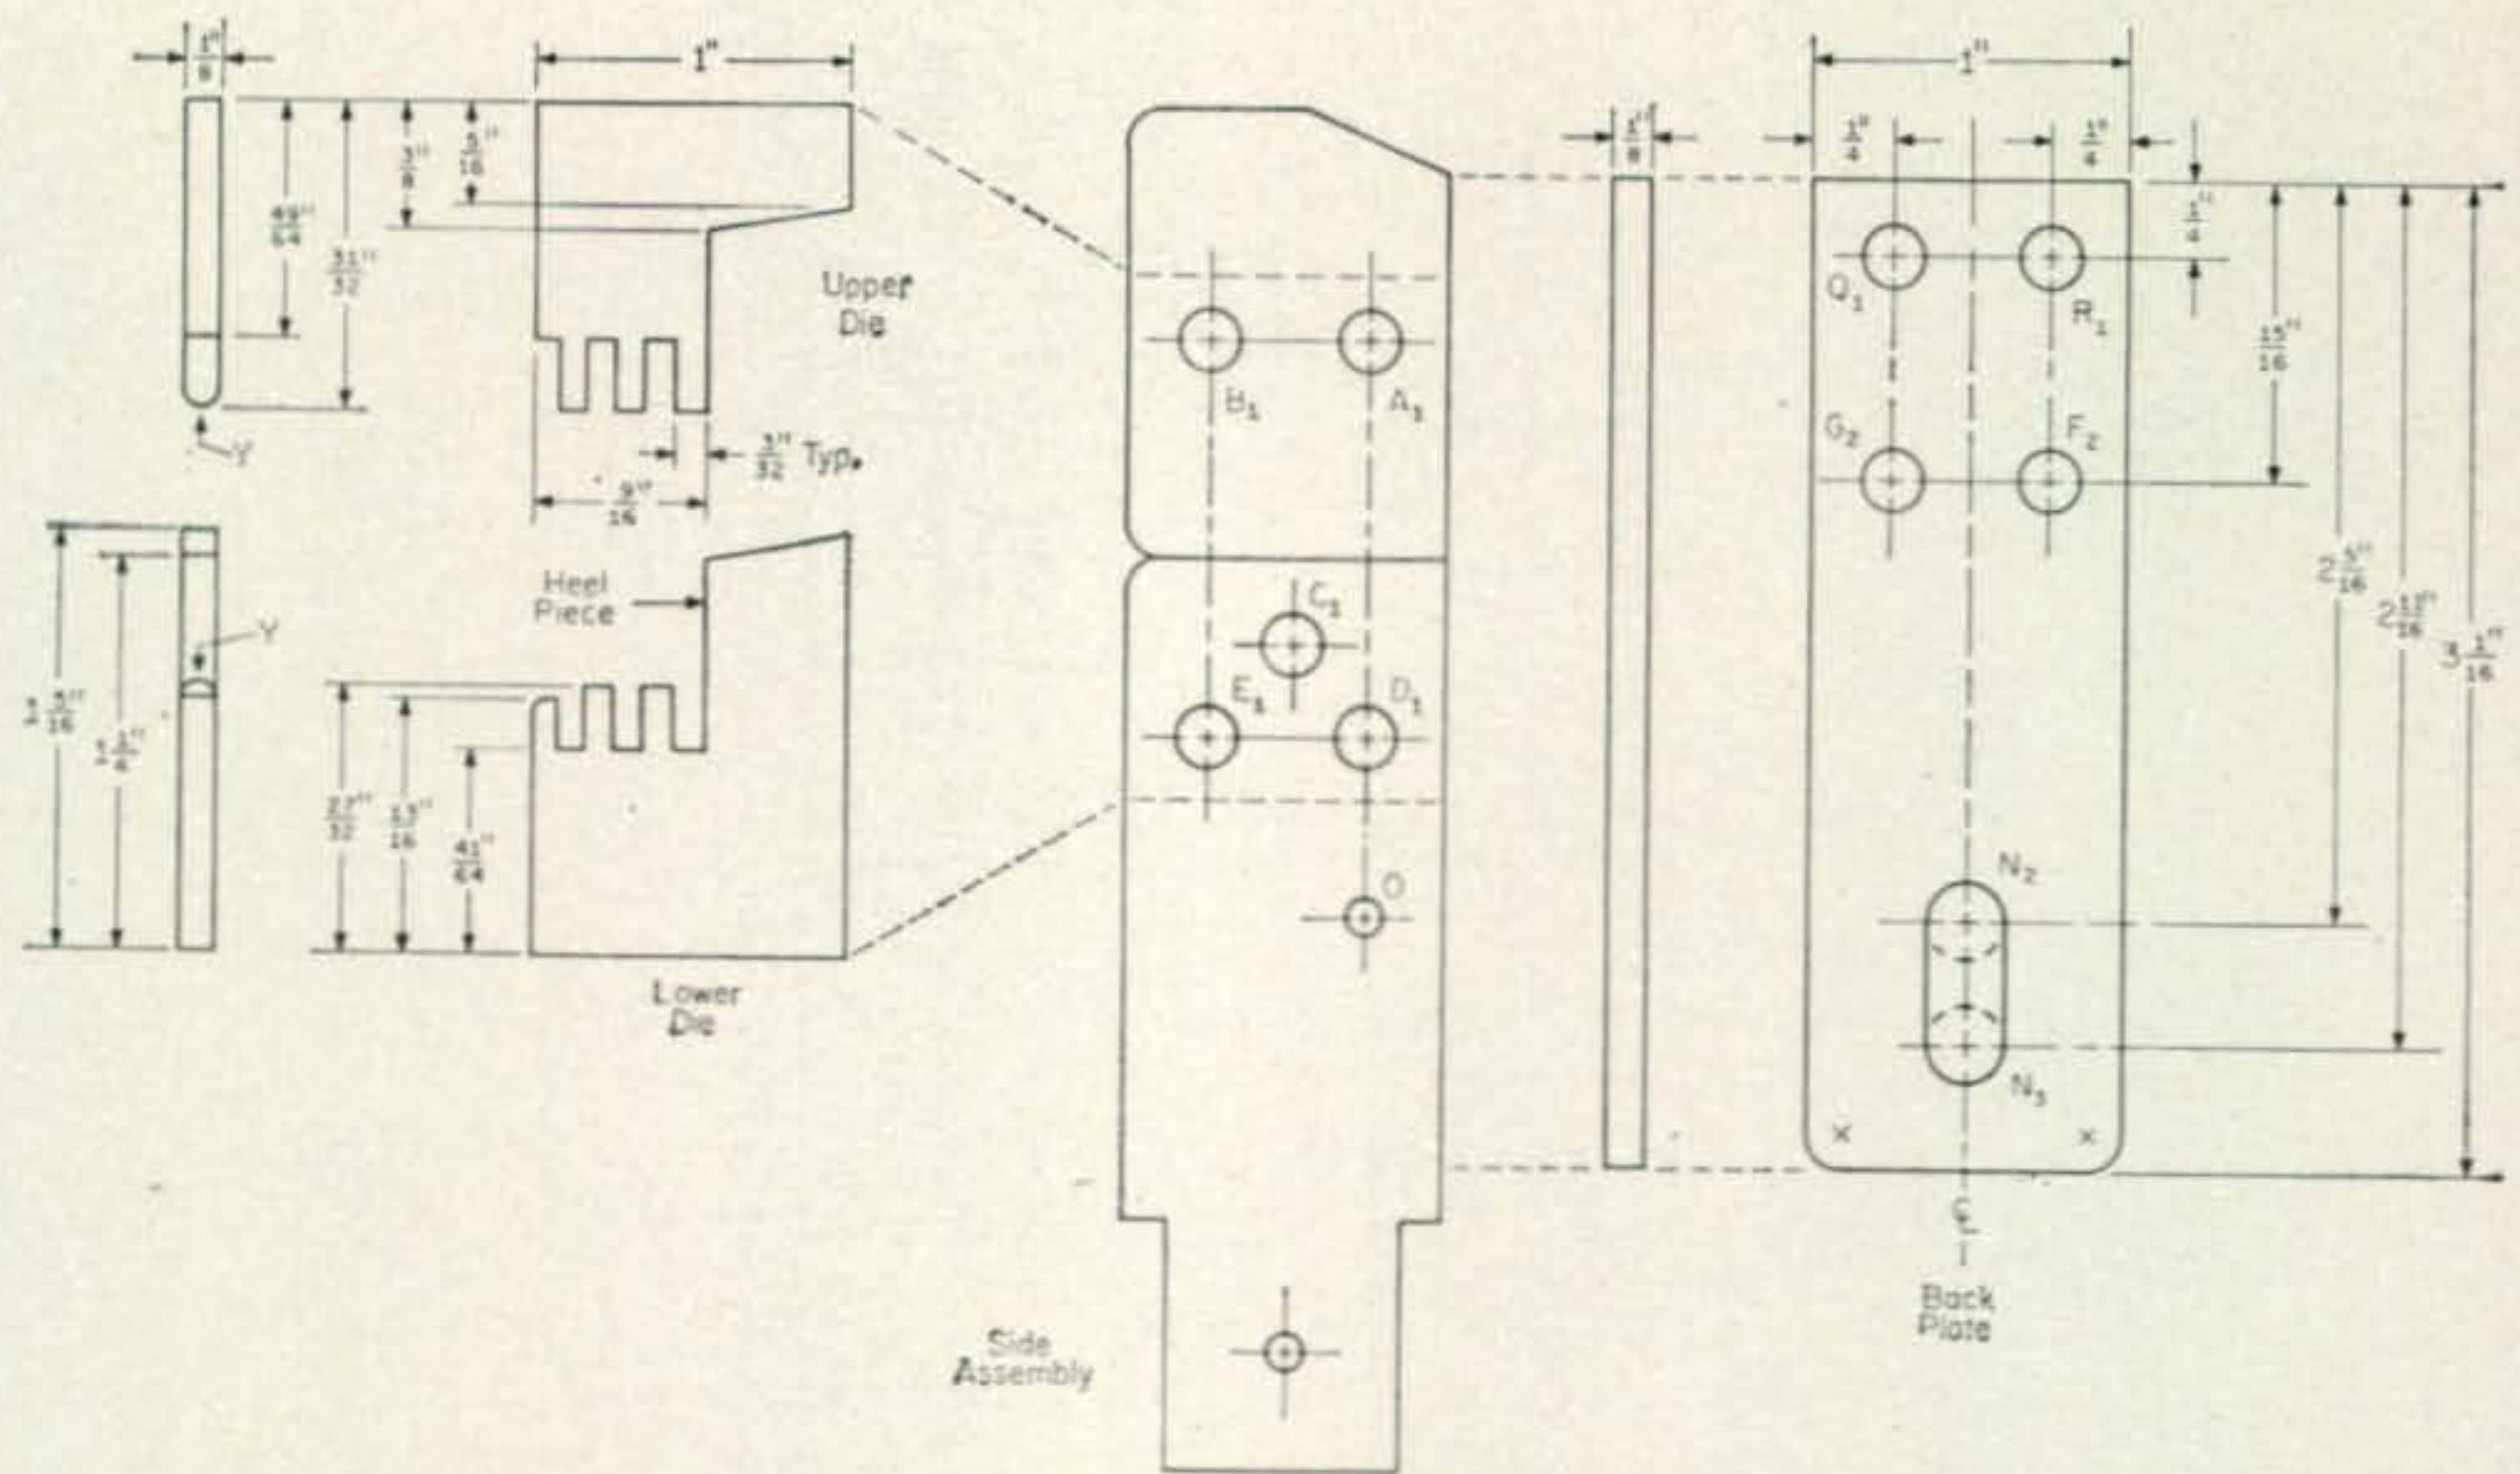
Details of the dies and back plate assembly fabricated from 1" X 1/8" mild steel bar. Round corners marked X to 1/8" radius and approx. 1/16" radius at corners marked Y.
